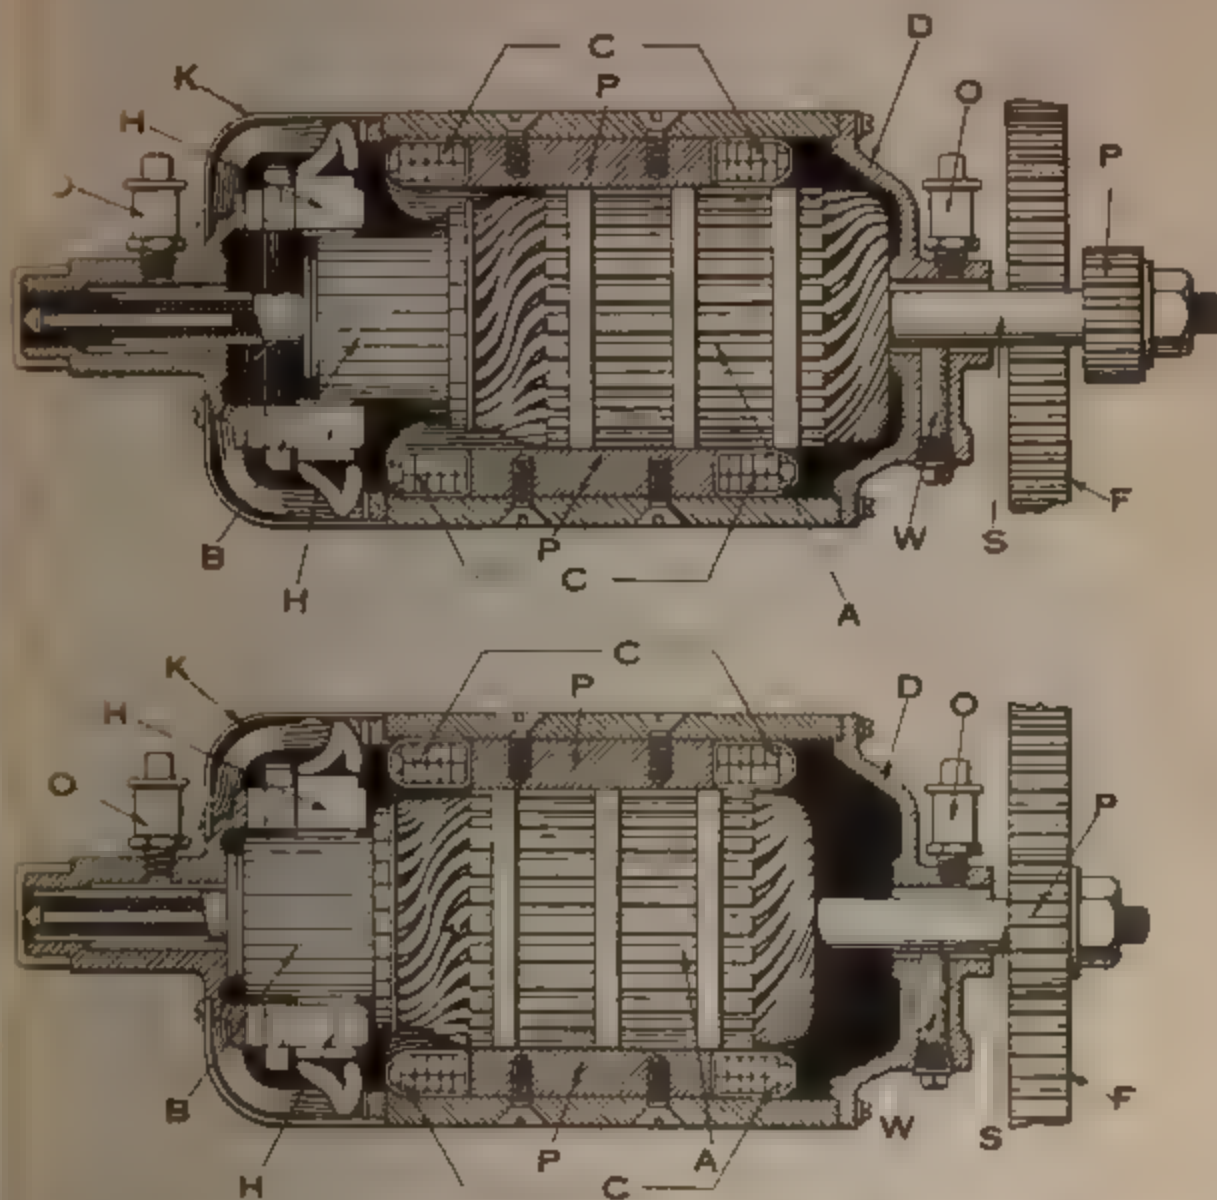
D Bosch magnetic gear-shift for engaging armature of starting motor with fly-wheel. Upper view shows pinion disengaged, lower view shows pinion in mesh
